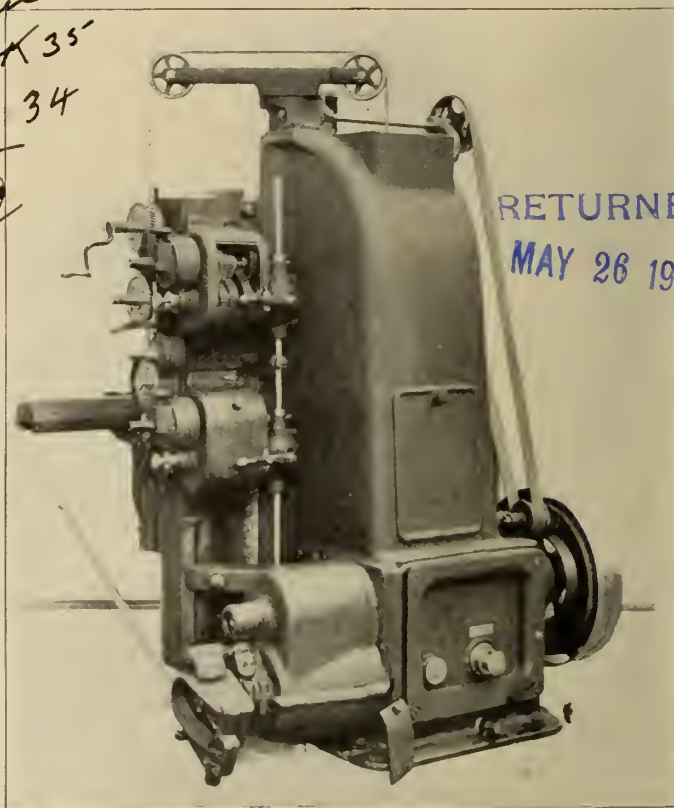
Rear View, Showing Driving and Feeding Mechanisms.
